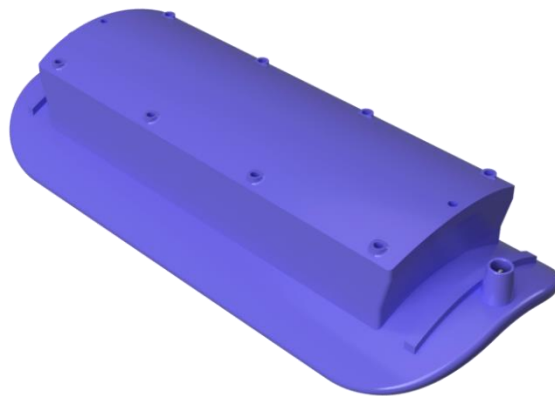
Clamp-on with similar design as version 1 for the current market, but with broader base with copper wires for electrofusion welding.
